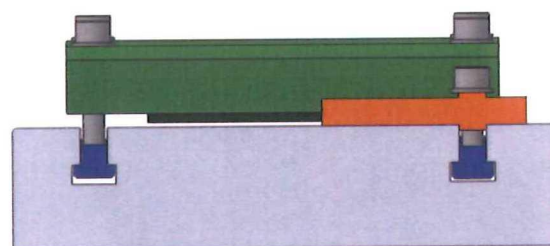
Side-view of the Z51414 fixture. The T-slots make the tool very flexible.
